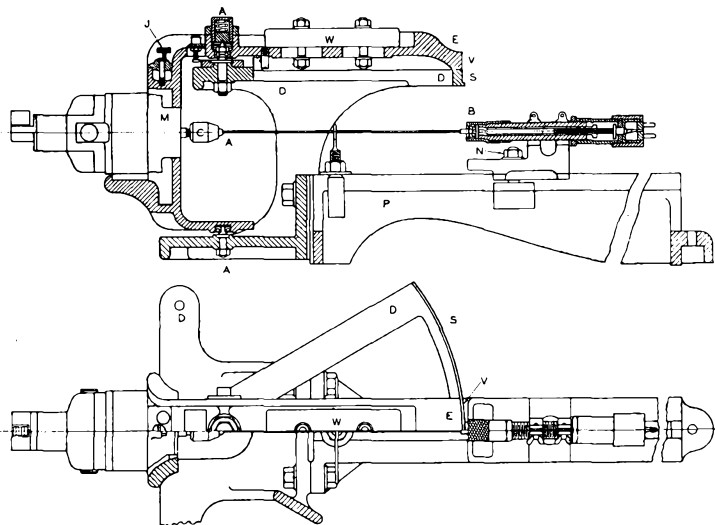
HAIGH-ROBERTSON MACHINE.
